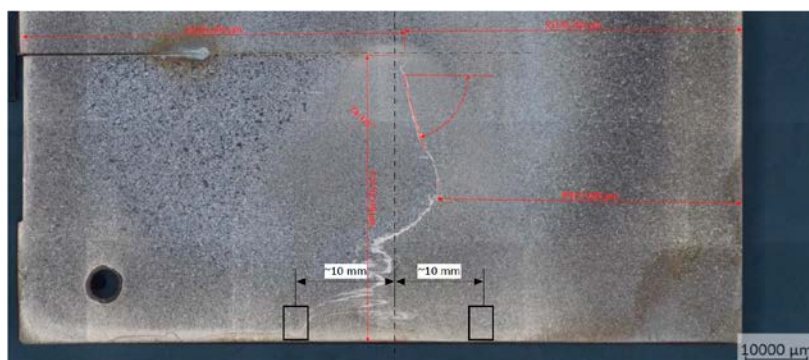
Image of a friction stir weld before polishing. The contour of the weld is visible and a narrow light band close to the centre line of the weld. The black squares shows the approximate location of the samples.
